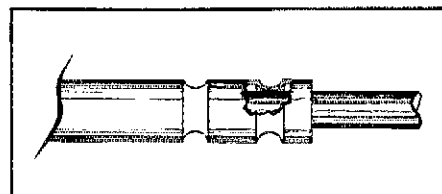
Use the new roller to groove the larger tube of a slip joint. This reduces the tube's inner diameter slightly to provide a snug fit with a smaller tube.
